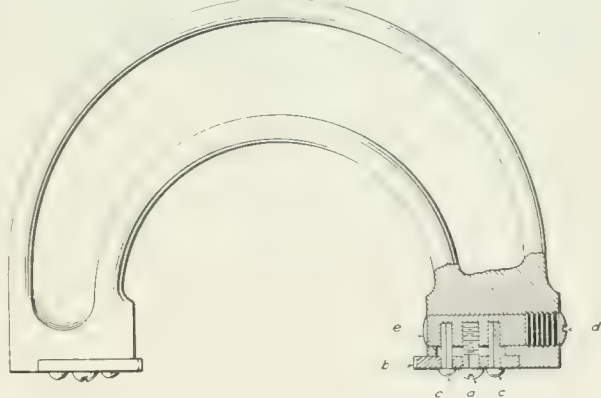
Sectional View Giving Details of the Adjustable Blade.
